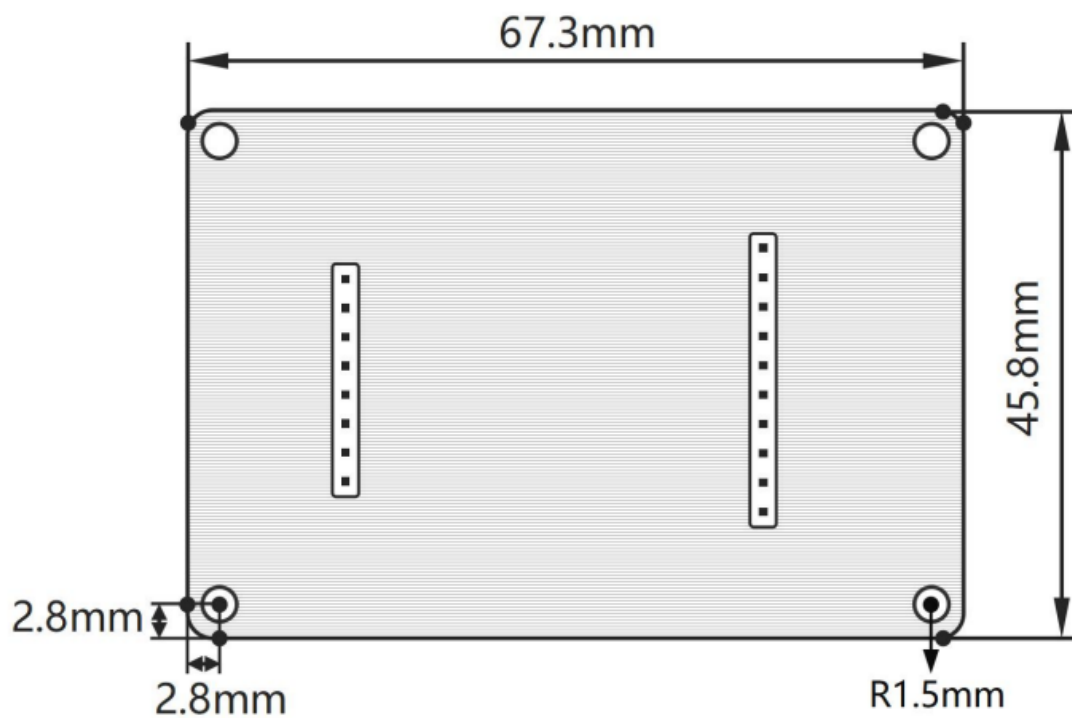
Dimensional drawing of TEC103/TEC103L Evaluation Board
